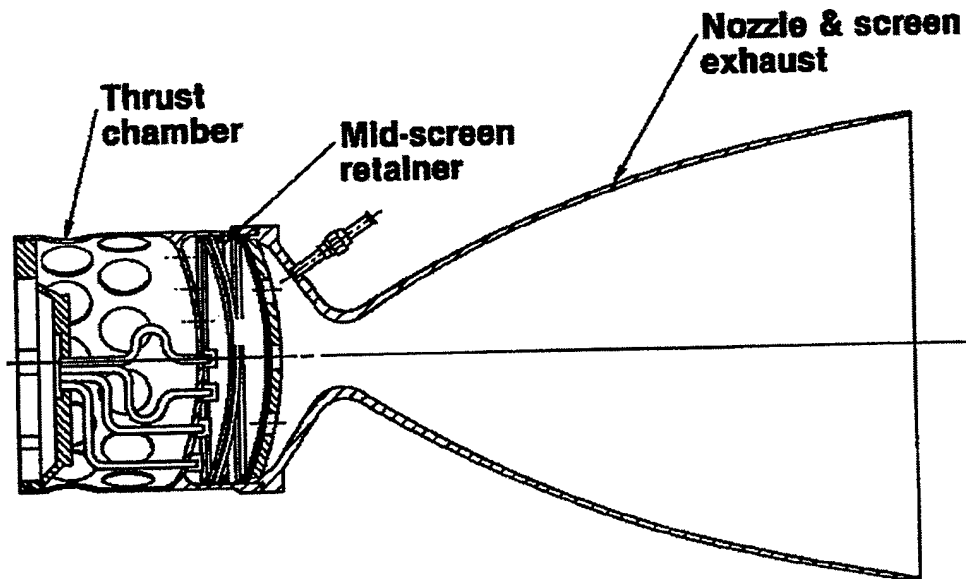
Spacecraft contractor drawing of thrust chamber and nozzle.
